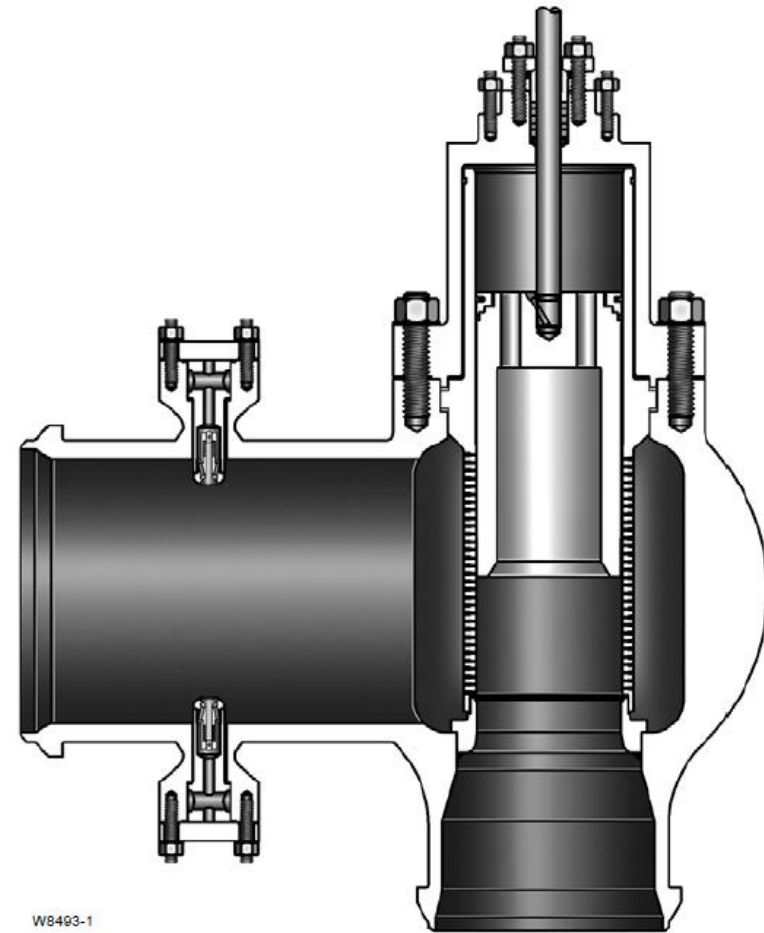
Cross-Section View of Steam Conditioning Valve
